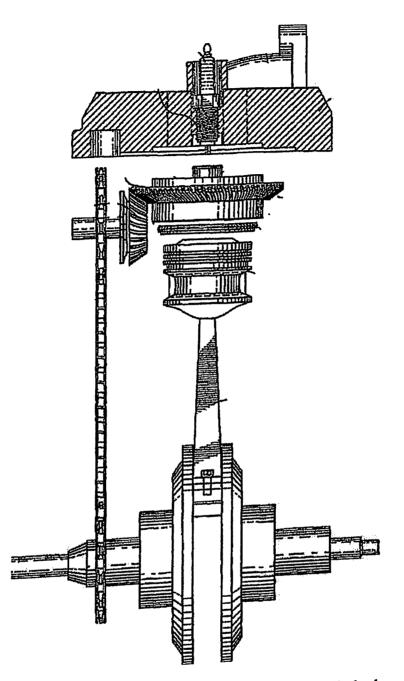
Front view of the Disc Valve System without the cylinder box and cylinder.
